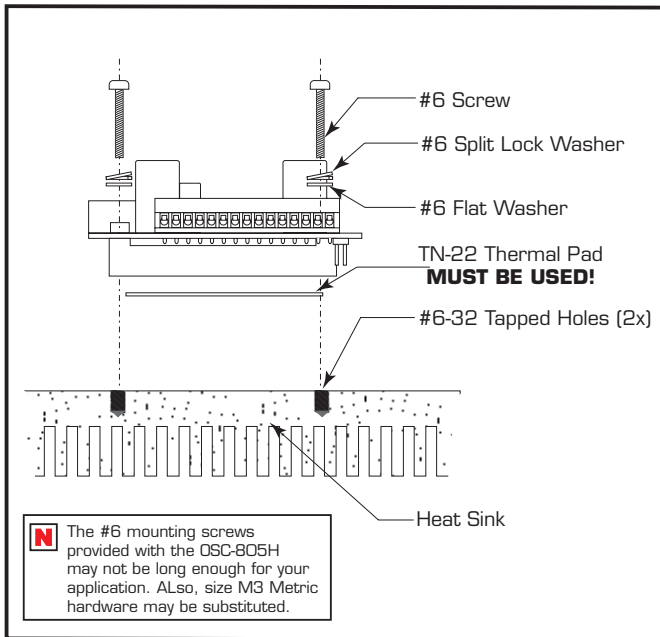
Heat Sink Mounting the OSC-805H/IM805H Assembly
